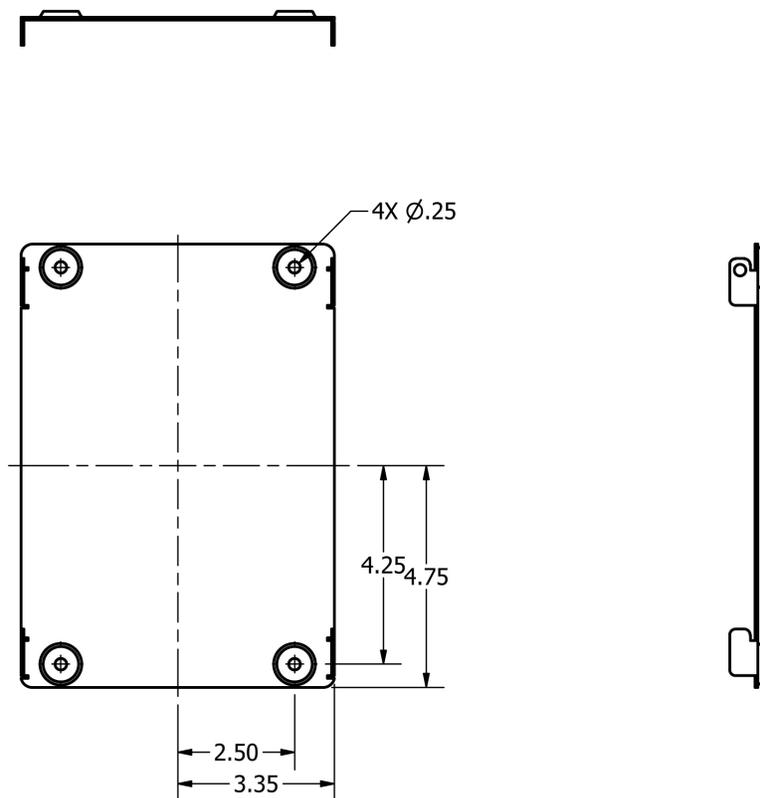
IRIS Power Supply mounting bracket dimensions (inches)
